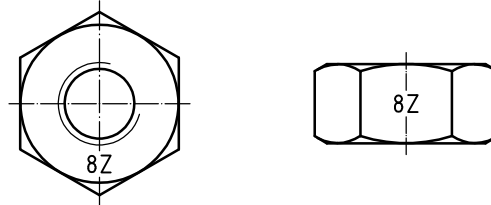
Example of marking of hot dip galvanized nuts tapped oversize to tolerance position 6AZ after coating
